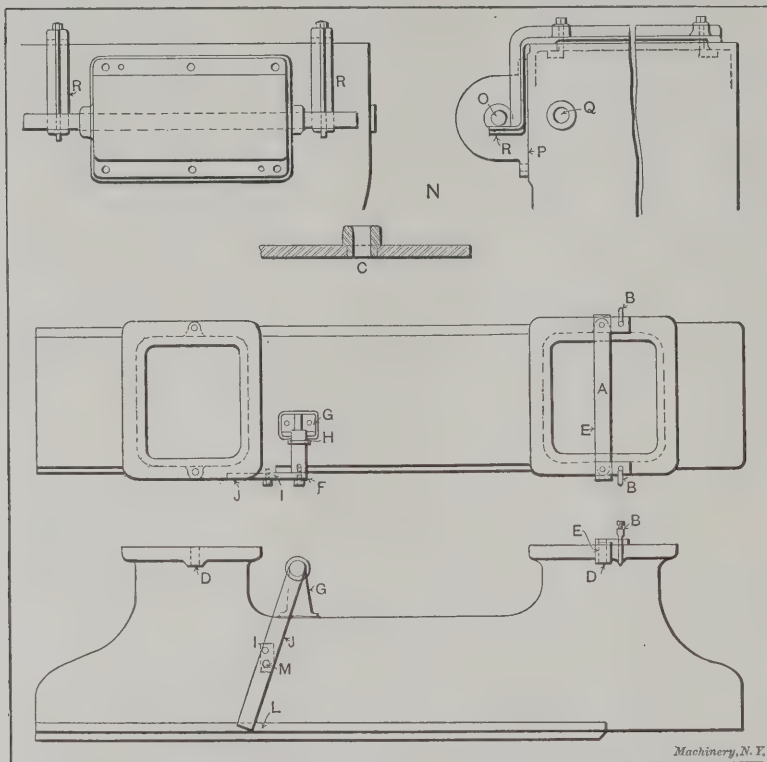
Special Gages and Templets for Laying-out and Aligning Operations on a Turret Lathe Bed
